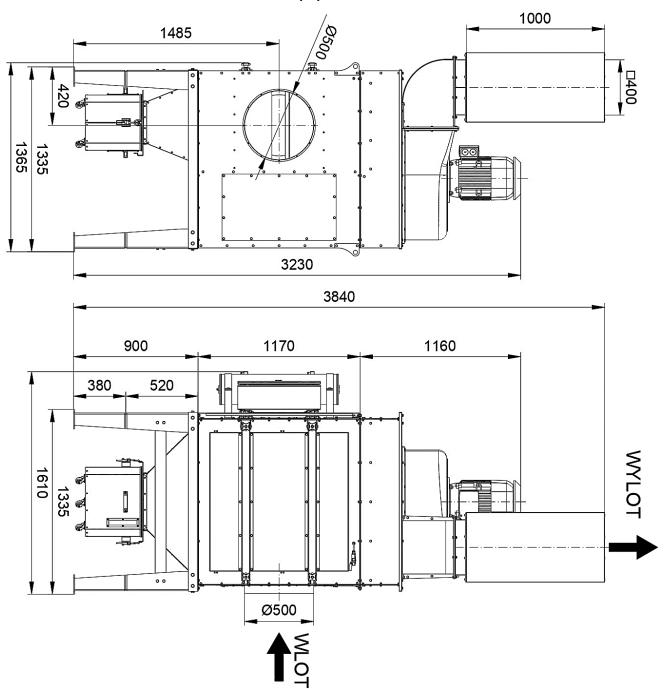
Overall dimensions of the device UFO-A-5000-N(/R)-RH (with an inlet on the right)
